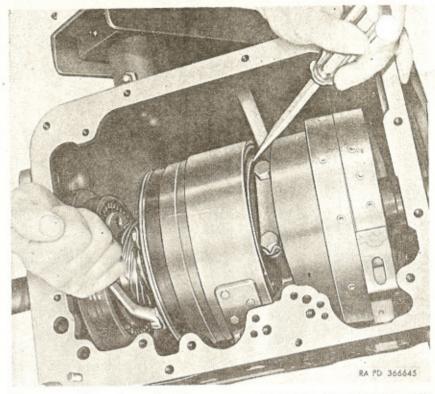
Removing or installing reverse center gear flange bolts (303M).
